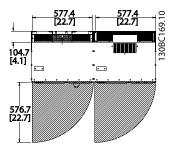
Space in front of IP21/IP54 enclosure type, frame size E9
